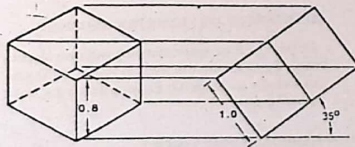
Side view shows the actual angle of an isometric drawing
